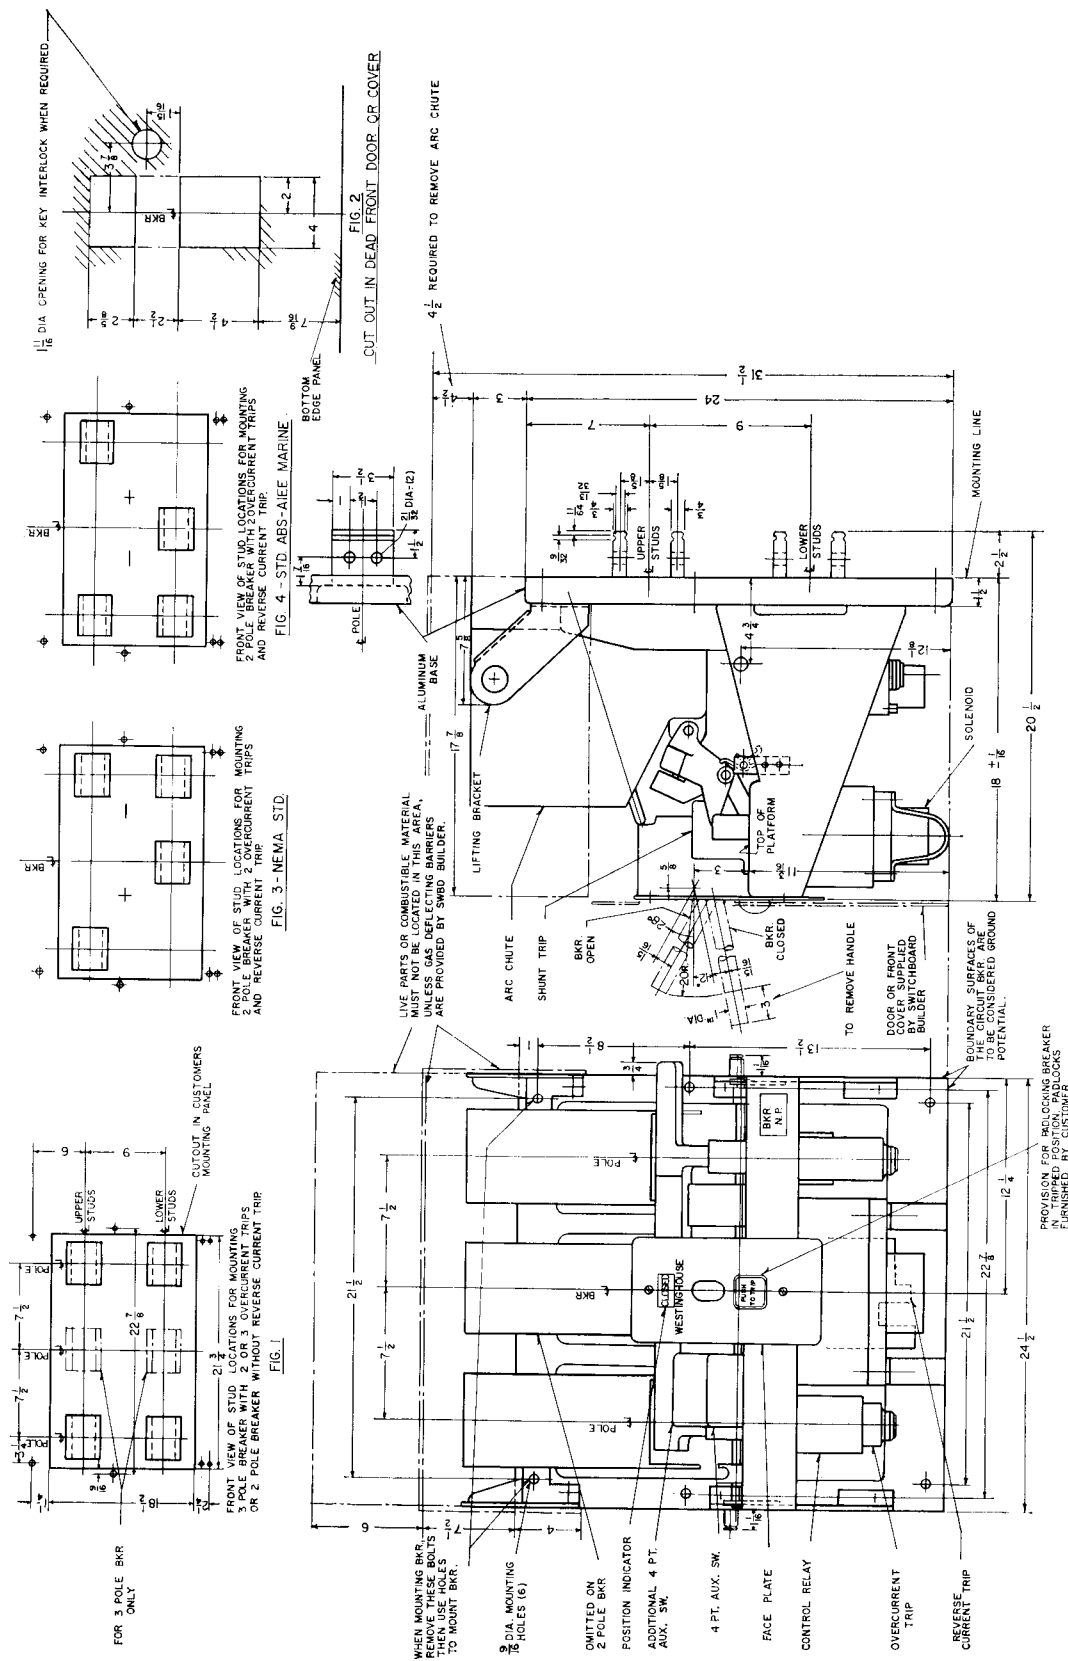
A. Type DB-75 Air Circuit Breaker, Outline and Mounting Dimensions
